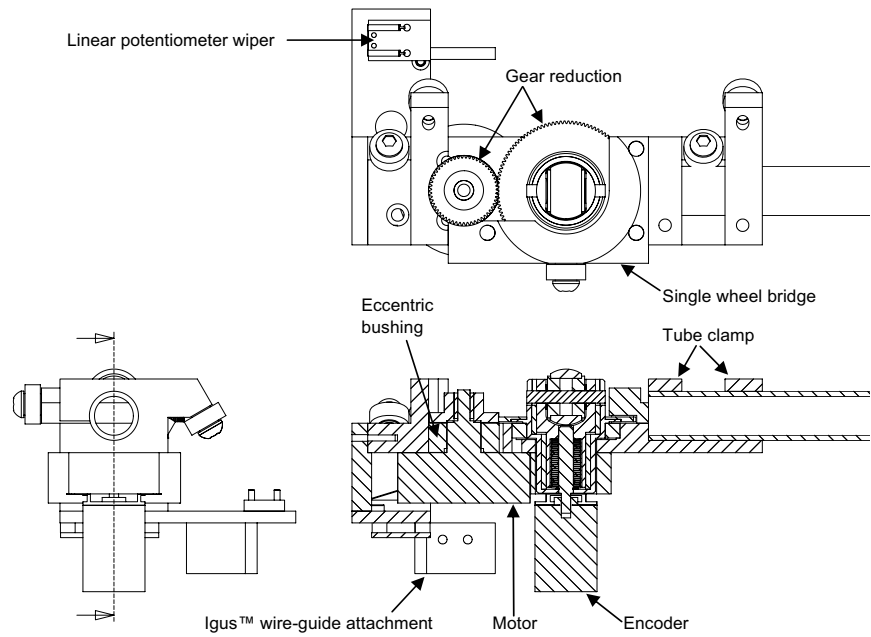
Carriage features. Each carriage relates a CVT wheel to a proximal link. It houses the steering motor which drives the steering bell assembly via a single-stage gear pair. An eccentric bushing allows fine adjustment of the inter-gear spacing.
